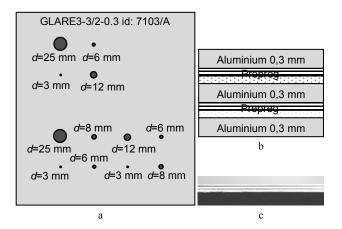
GLARE3-3/2 test sample (a); drawing of the cross – section of the test sample (b); image of the cross – section of the test sample (c);
